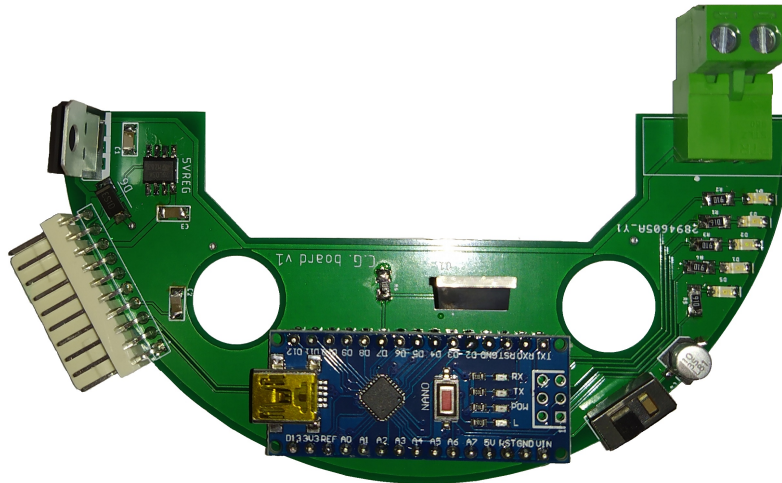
Designed PCB with a control board and other necessary electronic equipment.
